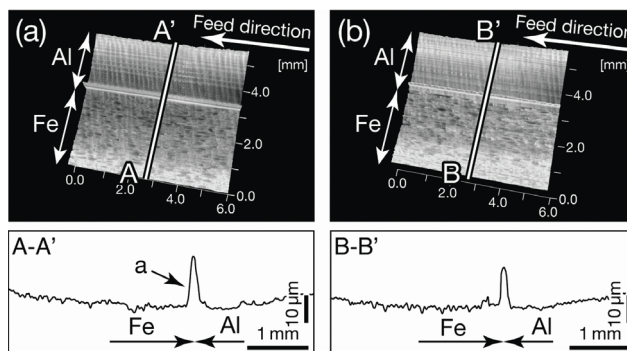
Surface topography of the multi-material machined by (a) AlCrN and (b) TiAlN coated tools, at the cutting speed of 100 m/min
